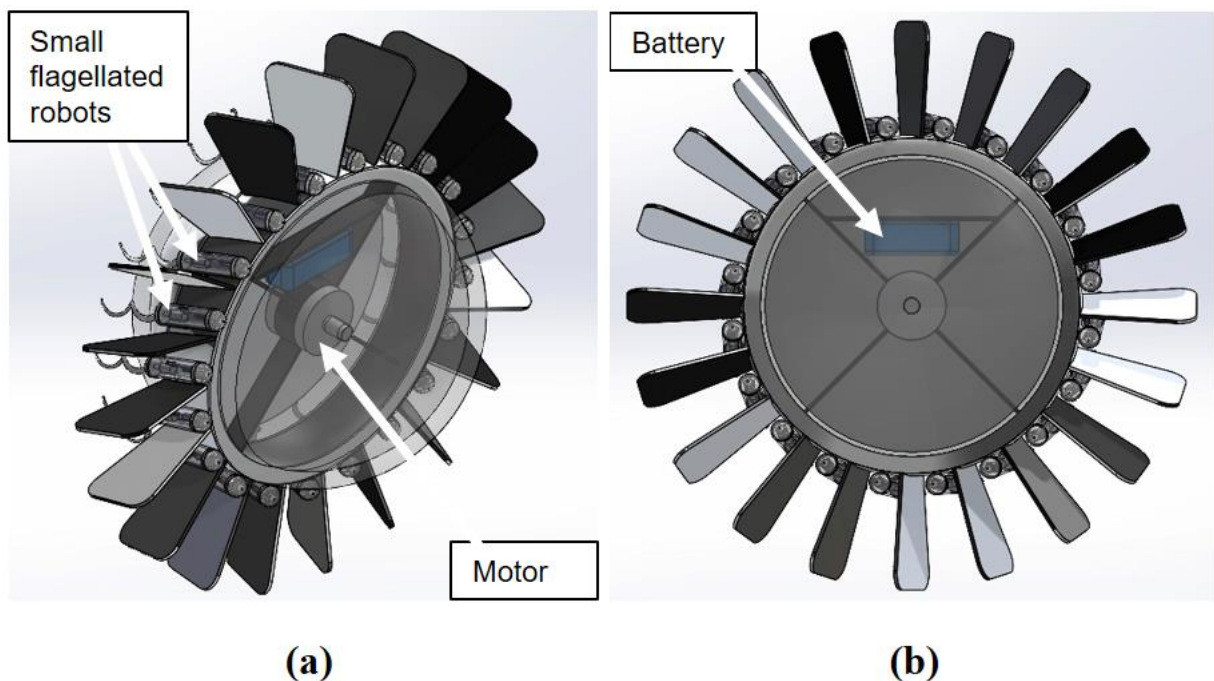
(a) Isometric view and (b) front view of alternative spinning robot design.
